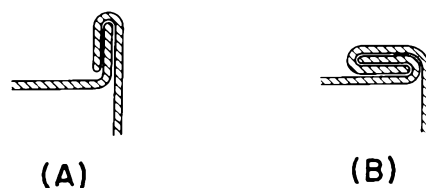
Lock Seam: (A) first fold; (B) completed lock seam
